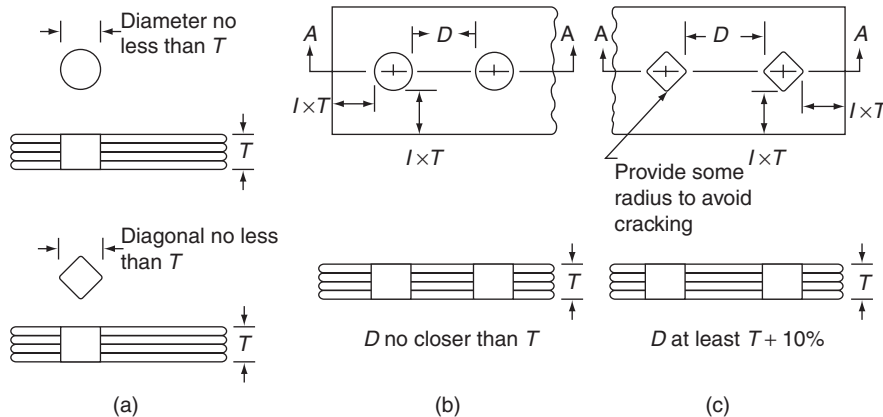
Plastic laminates can be punched, machined and engraved.
